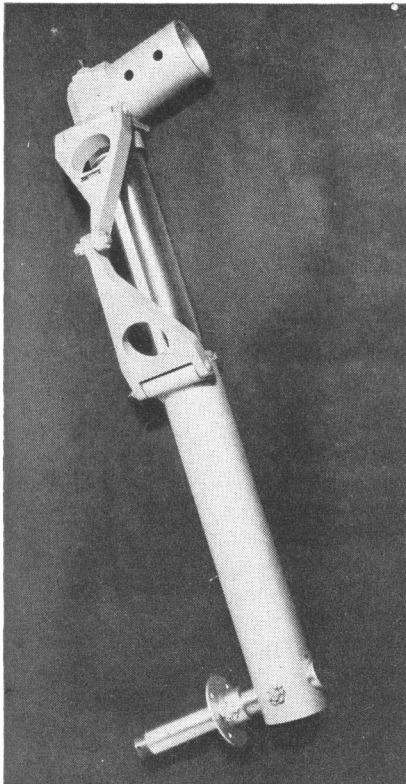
Seabee main landing gear strut. The production version of this unit had a simple elbow fitting for attachment to the hull shaft.
